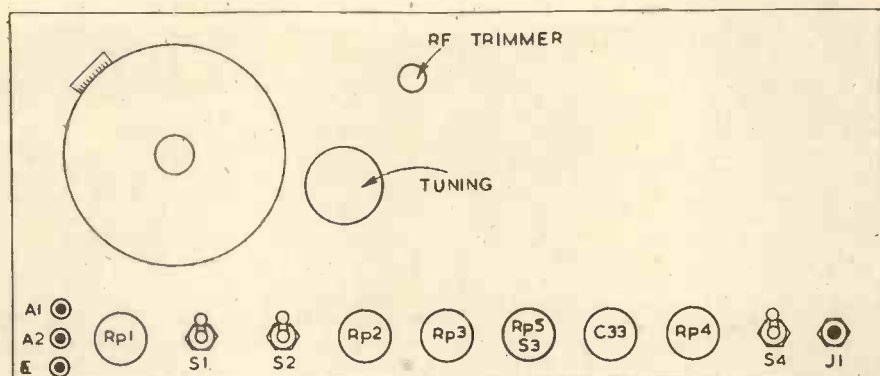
A panel arrangement to use with the chassis layout of Fig. 3.
